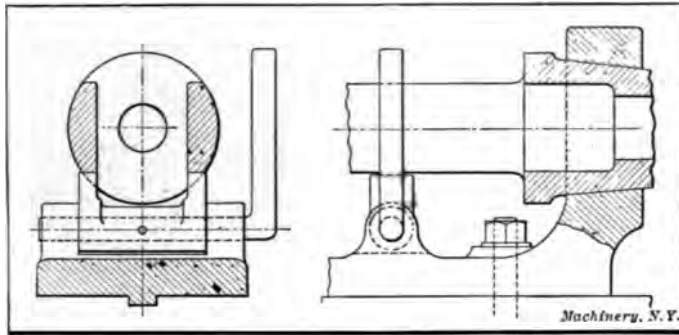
Lock for Open Spindle of John Lang & Sons Turret Lathe
